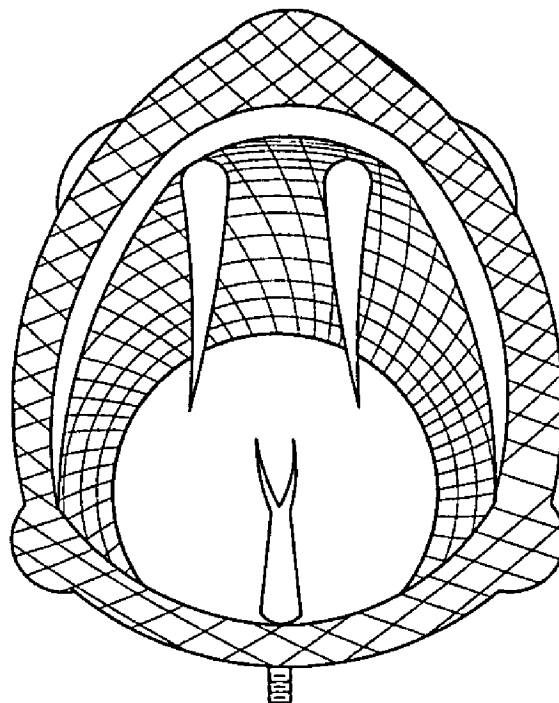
is a bottom plan view of a snake head motor vehicle exhaust tip showing my new design.
